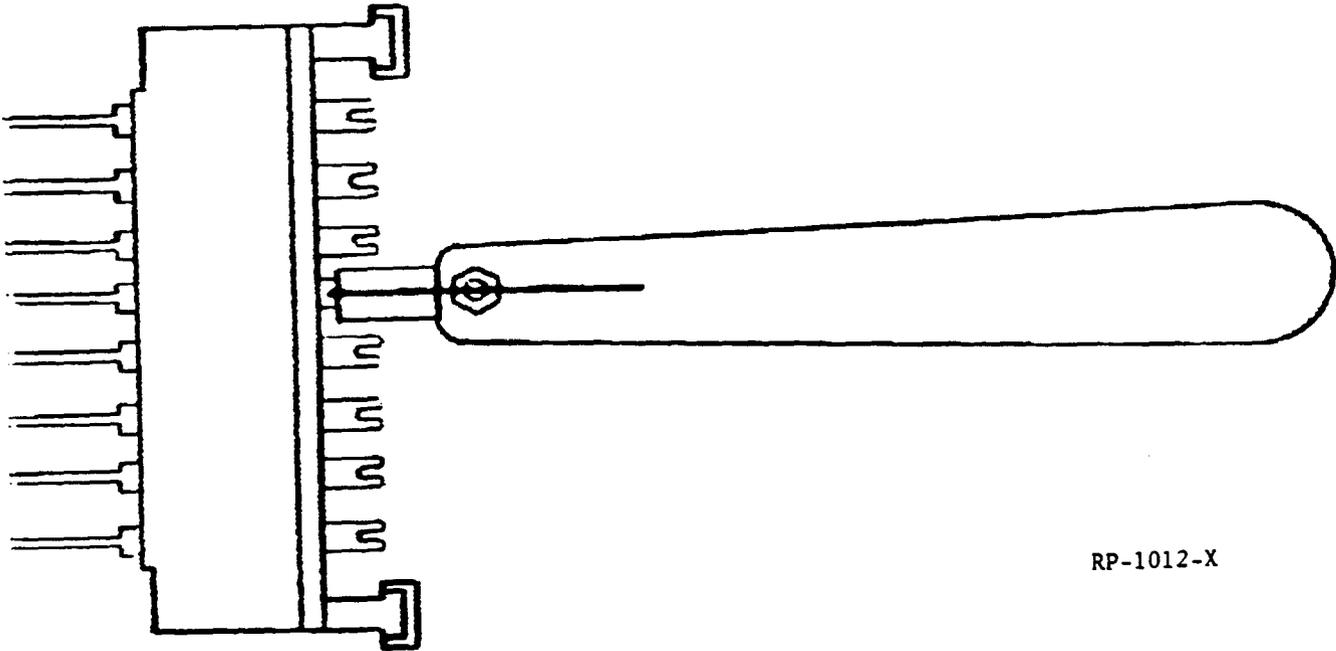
GRASPING QUICK-CONNECT WIRING TOOL FOR OPERATION (R-3794, 714E (MD) IS ILLUSTRATED BUT APPLIES EQUALLY AS WELL FOR 756B2 and 756D TOOLS
